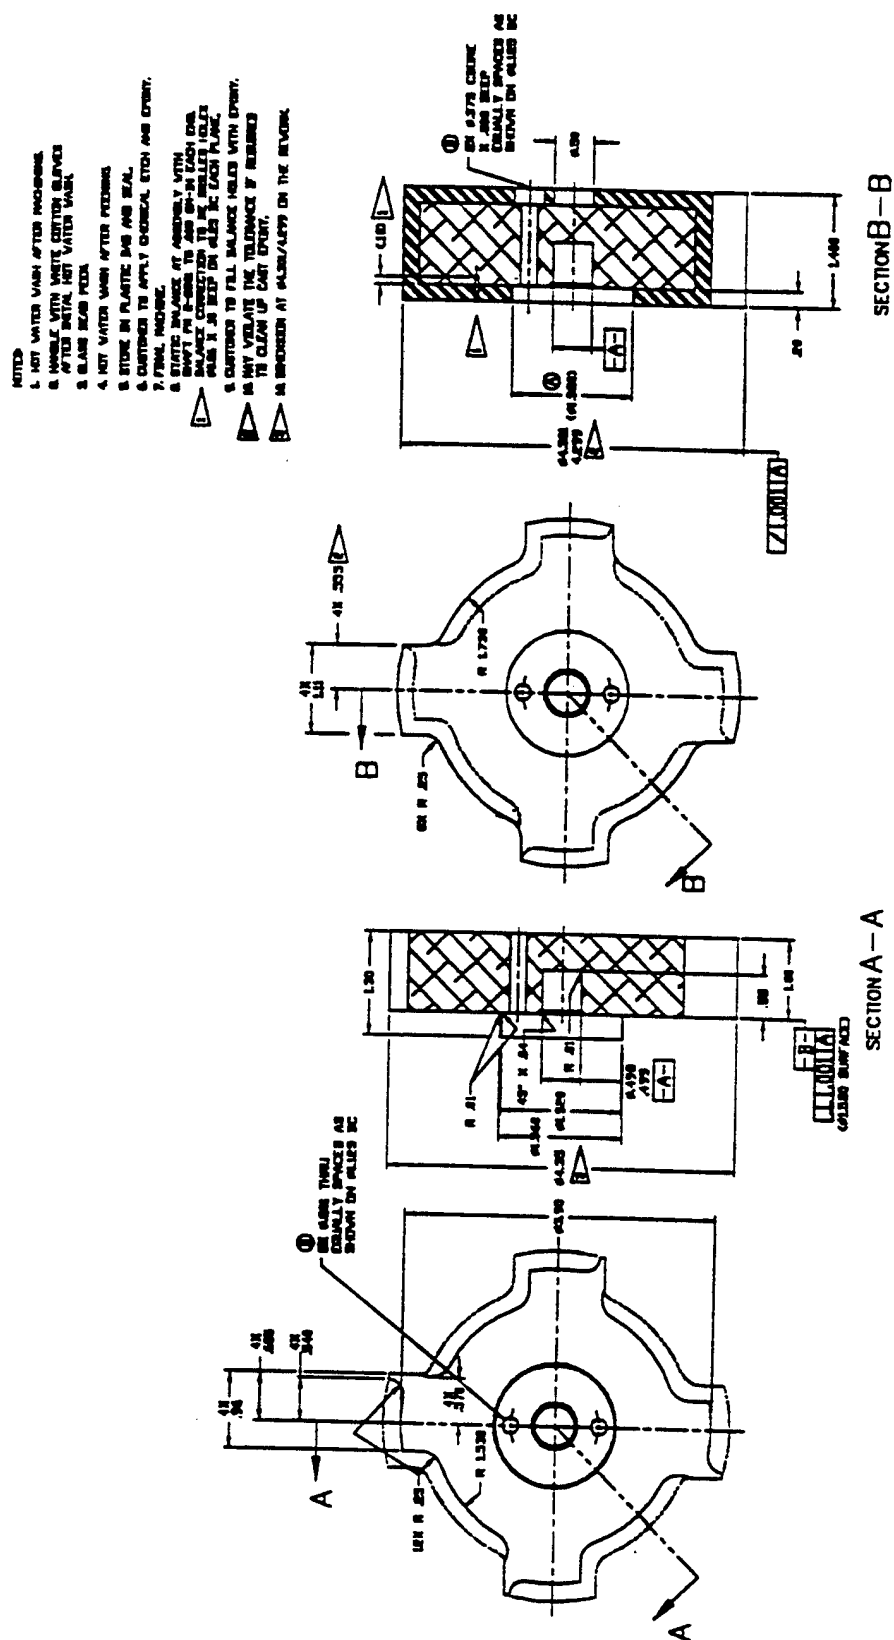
Rotor 2 Design Drawing (Adapted from Tech Development, Inc., Dayton, Ohio)
